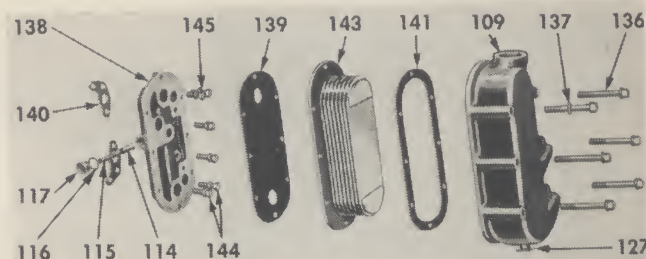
A—A GM engine oil cooler and oil cooler by-pass valve details. Oil cooler is mounted in the tractor front frame.
